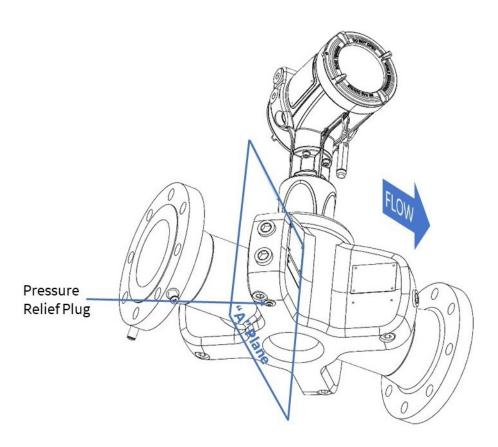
Upstream "A" Plane Sensor Quadrant - View 3 (Bottom)
